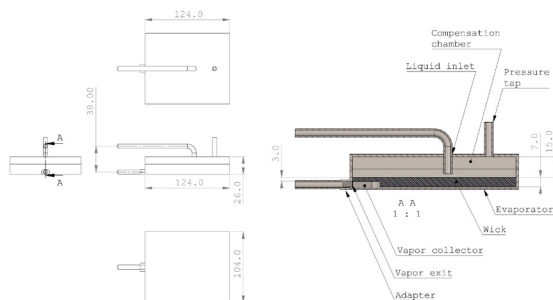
Exterior and section views of the flat-cuboidal evaporator (dimensions in mm).
